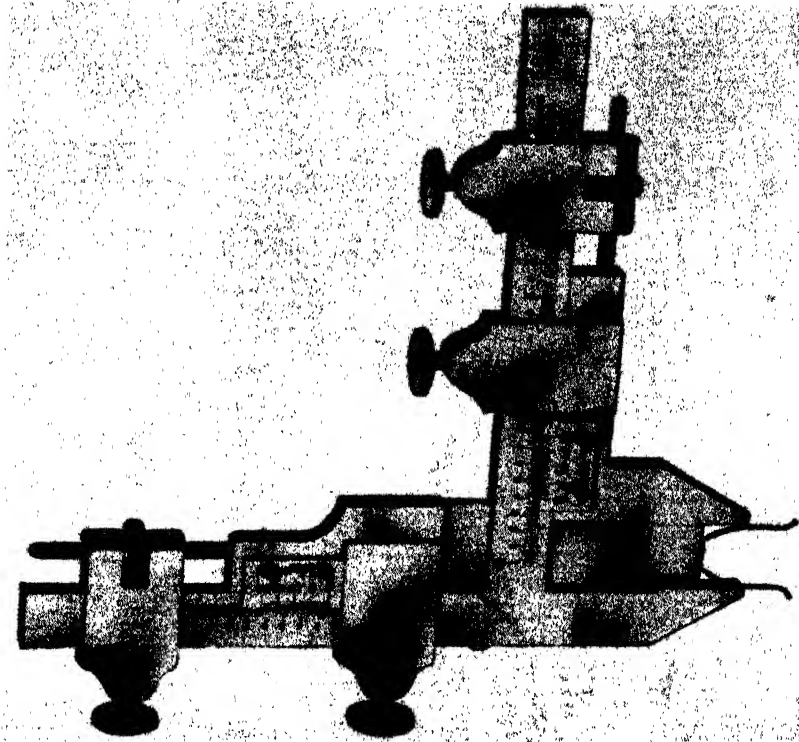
GEAR TOOTH VERNIER. (Courtesy, Brown & Sharpe Mfg. Co.)
